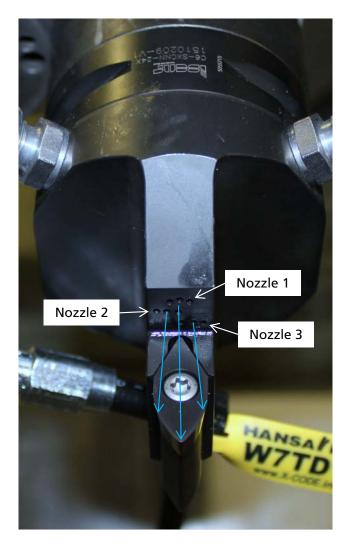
Prototype of tool holder which is capable to control the direction of coolant beam
